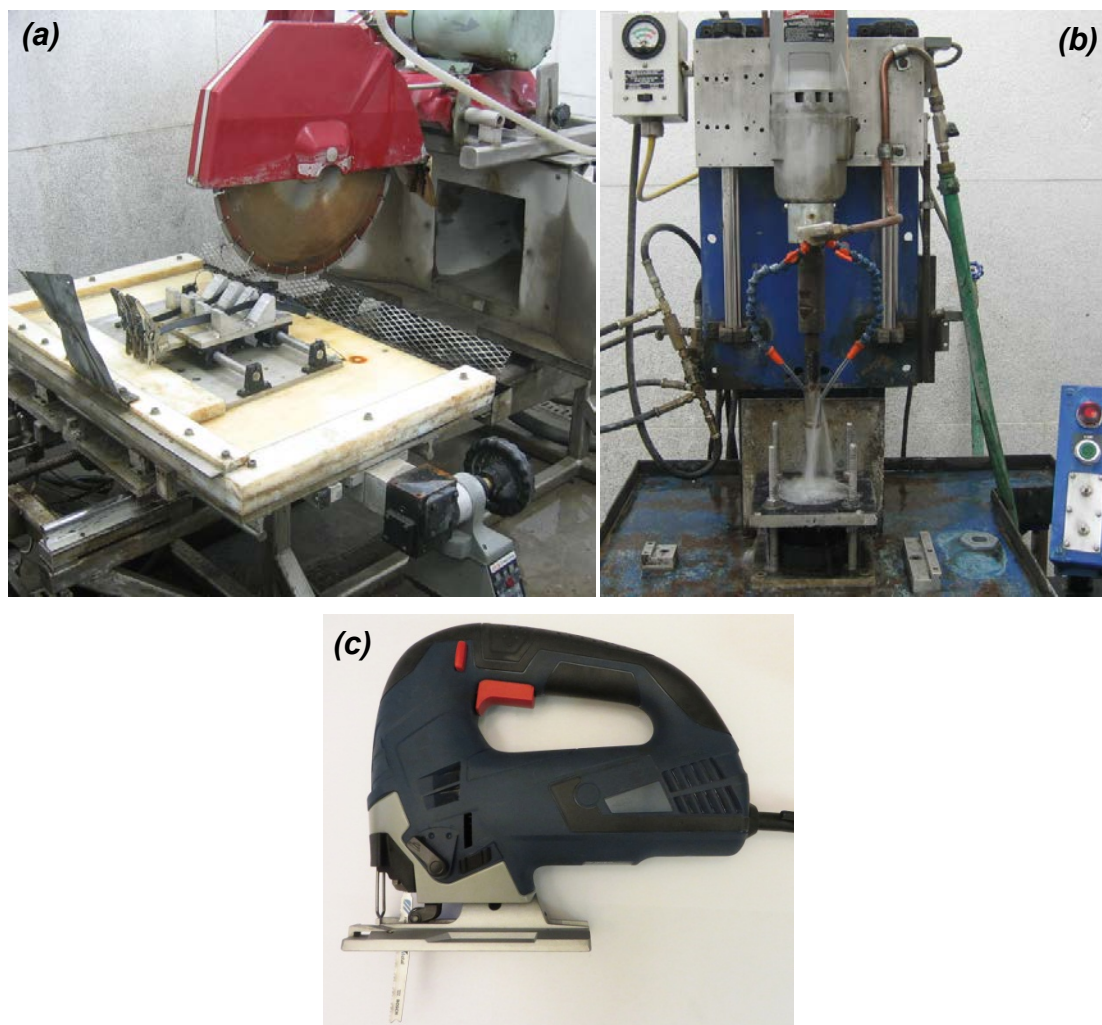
Equipment Used for Sample Preparation: a) Circular Saw, b) Core Drill, c) Jigsaw
